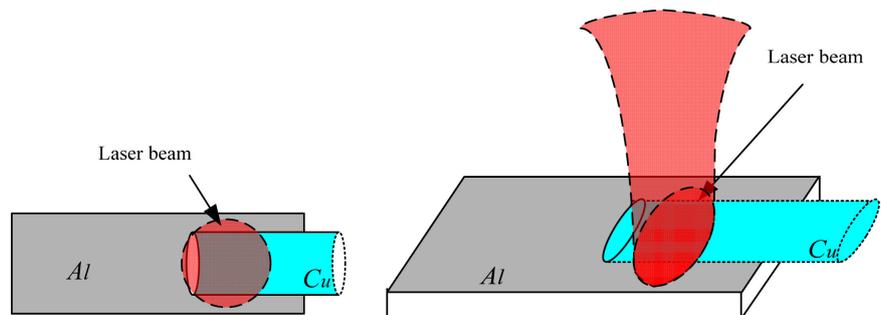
Plan view and three-dimensional view of laser micro welding.
